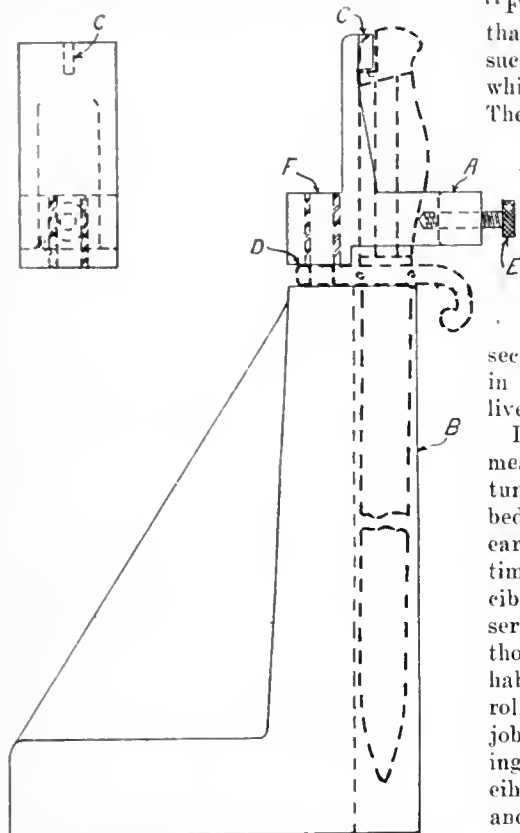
JIG AND BLOCK FOR DRILLING HOLE WHICH GOES OVER RIFLE BARREL
